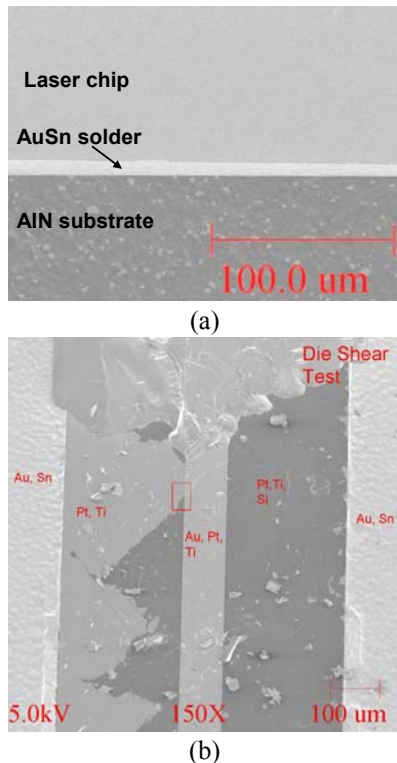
(a) A typical cross section of the laser chip die attach AuSn solder interface and (b) A typical SEM image of fracture interface after die shearing.
